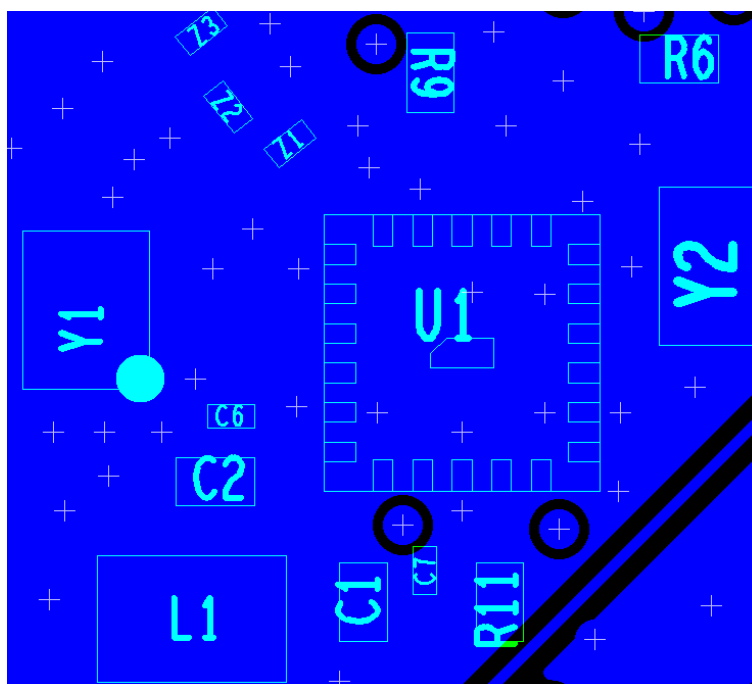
FCGQFN24 PCB placement and routing – GND bottom layer
